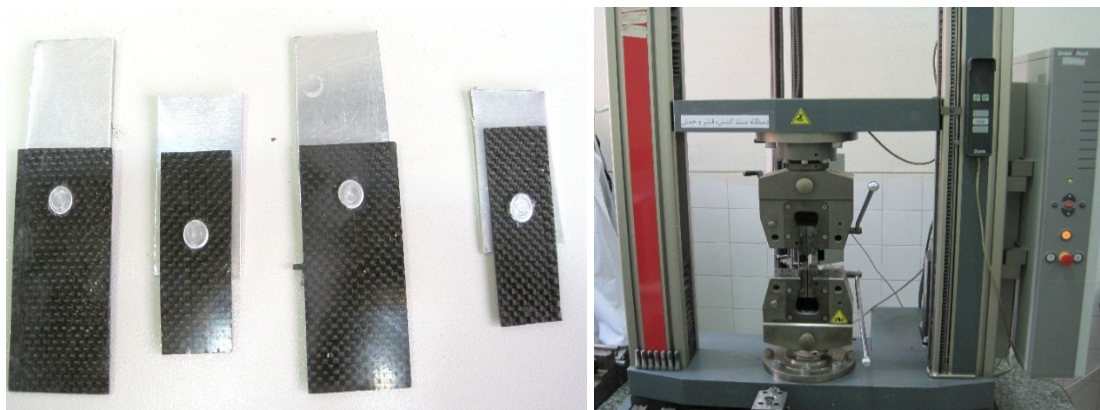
a). The joined CFRP and Aluminium samples, b). Tensile testing machine
